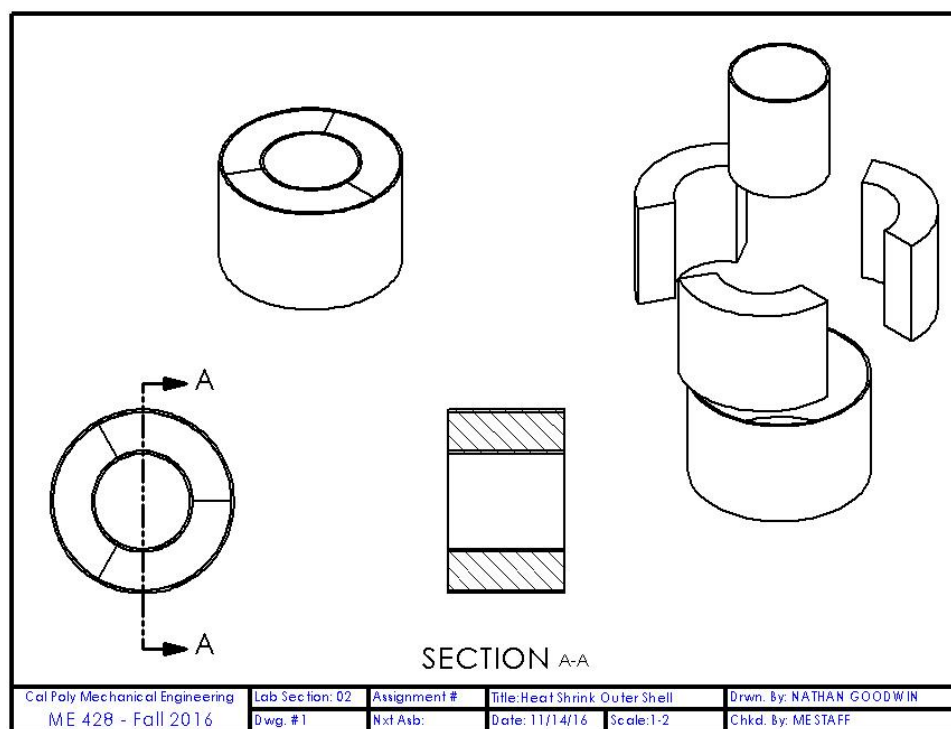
Layout drawing of the heat shrink outer shell joining method. This drawing is based on a full thickness band
